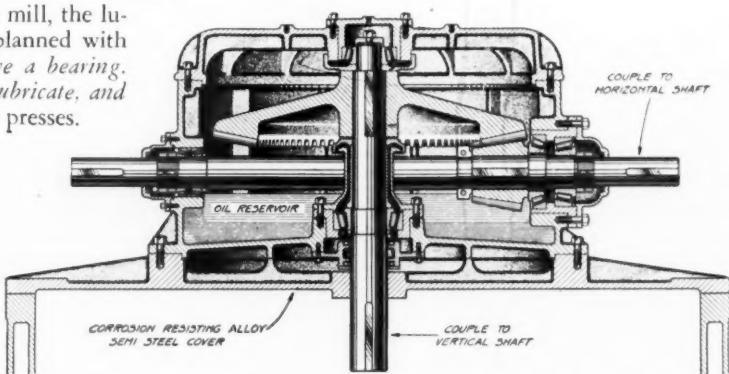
Herringbone and helical gear assembly on a French Mechanical Screw Press. Tightness of the gear case is important to prevent loss of lubricating oil or entry of product oil. Contamination of either must be prevented as far as possible.
